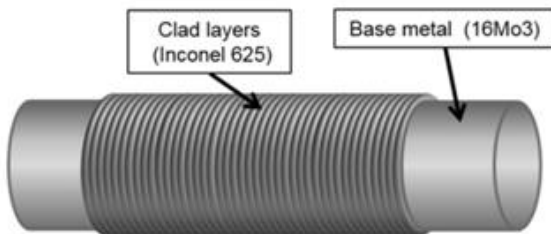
Schematic illustration of tubes of 16Mo3 steel with Inconel 625 welding overlay
